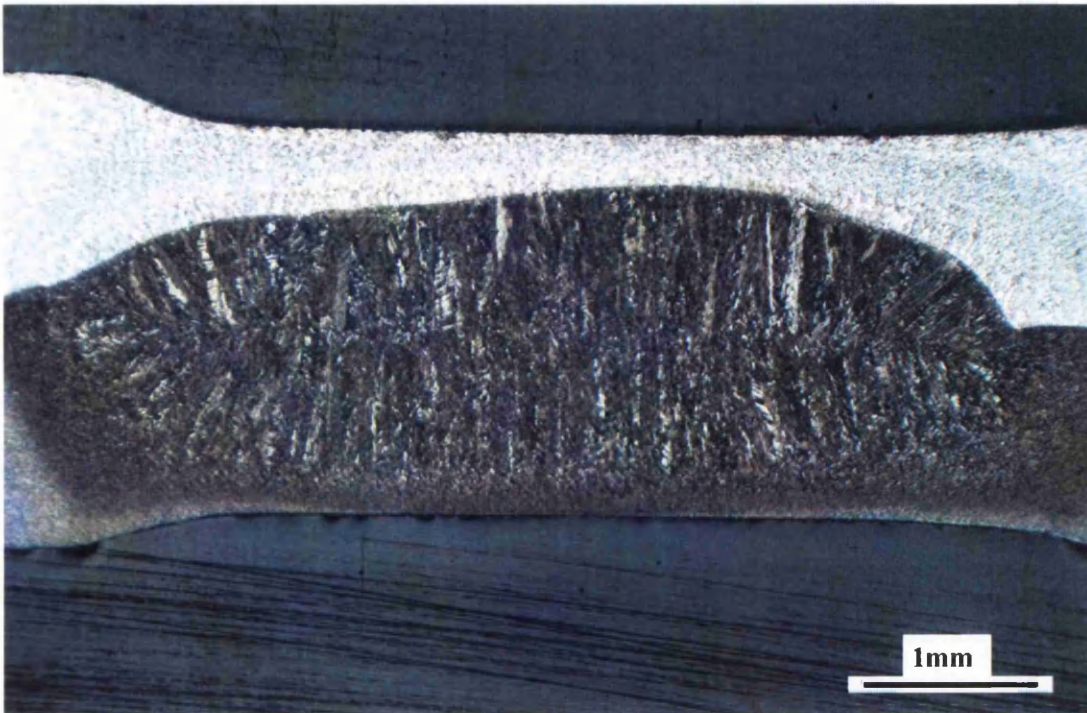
Macro of weld nugget formed between TRIP800 and LC
